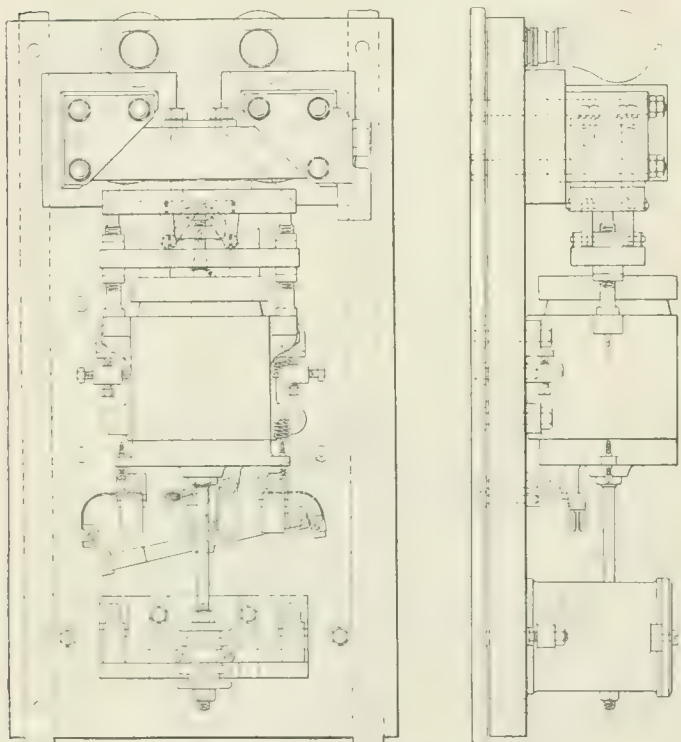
DIAGRAM SHOWING CONSTRUCTION OF SWITCH.
